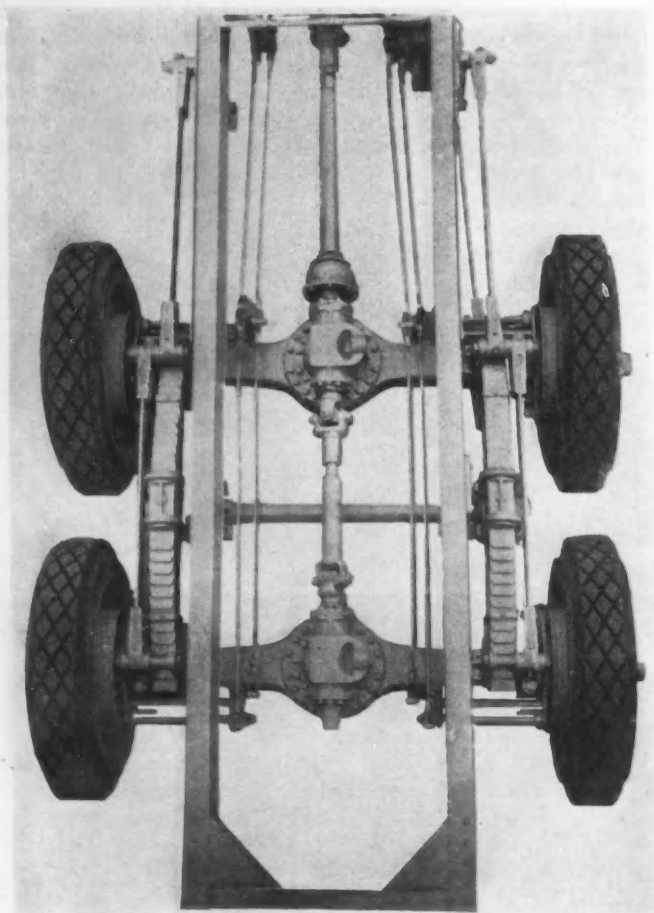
TOP VIEW OF DESIGN SHOWN IN FIG. 6
